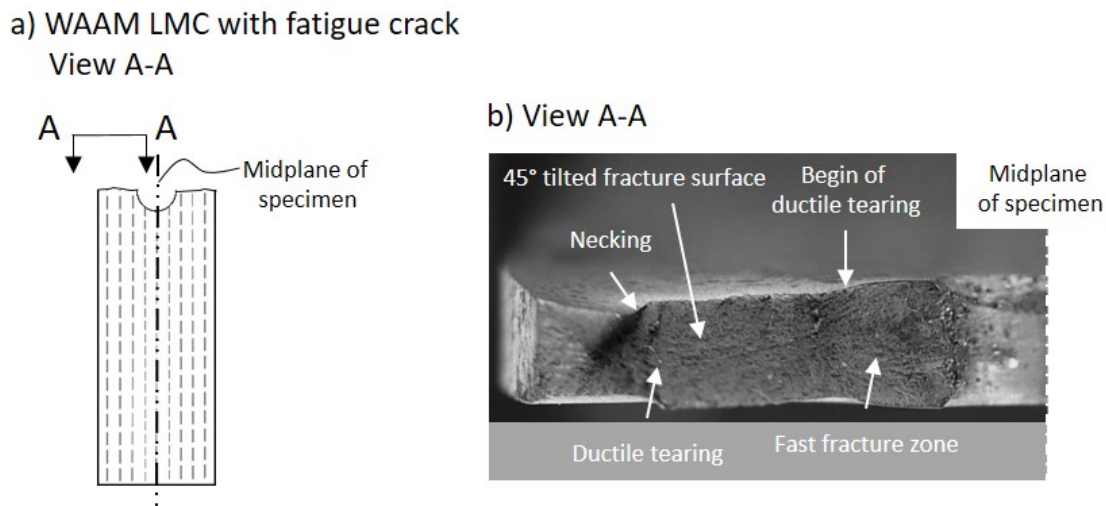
15. Fracture surface of fatigue-tested WAAM LMC. (a) WAAM LMC with fatigue crack View A-A; (b) View A-A (Spalek et al., 2021).
